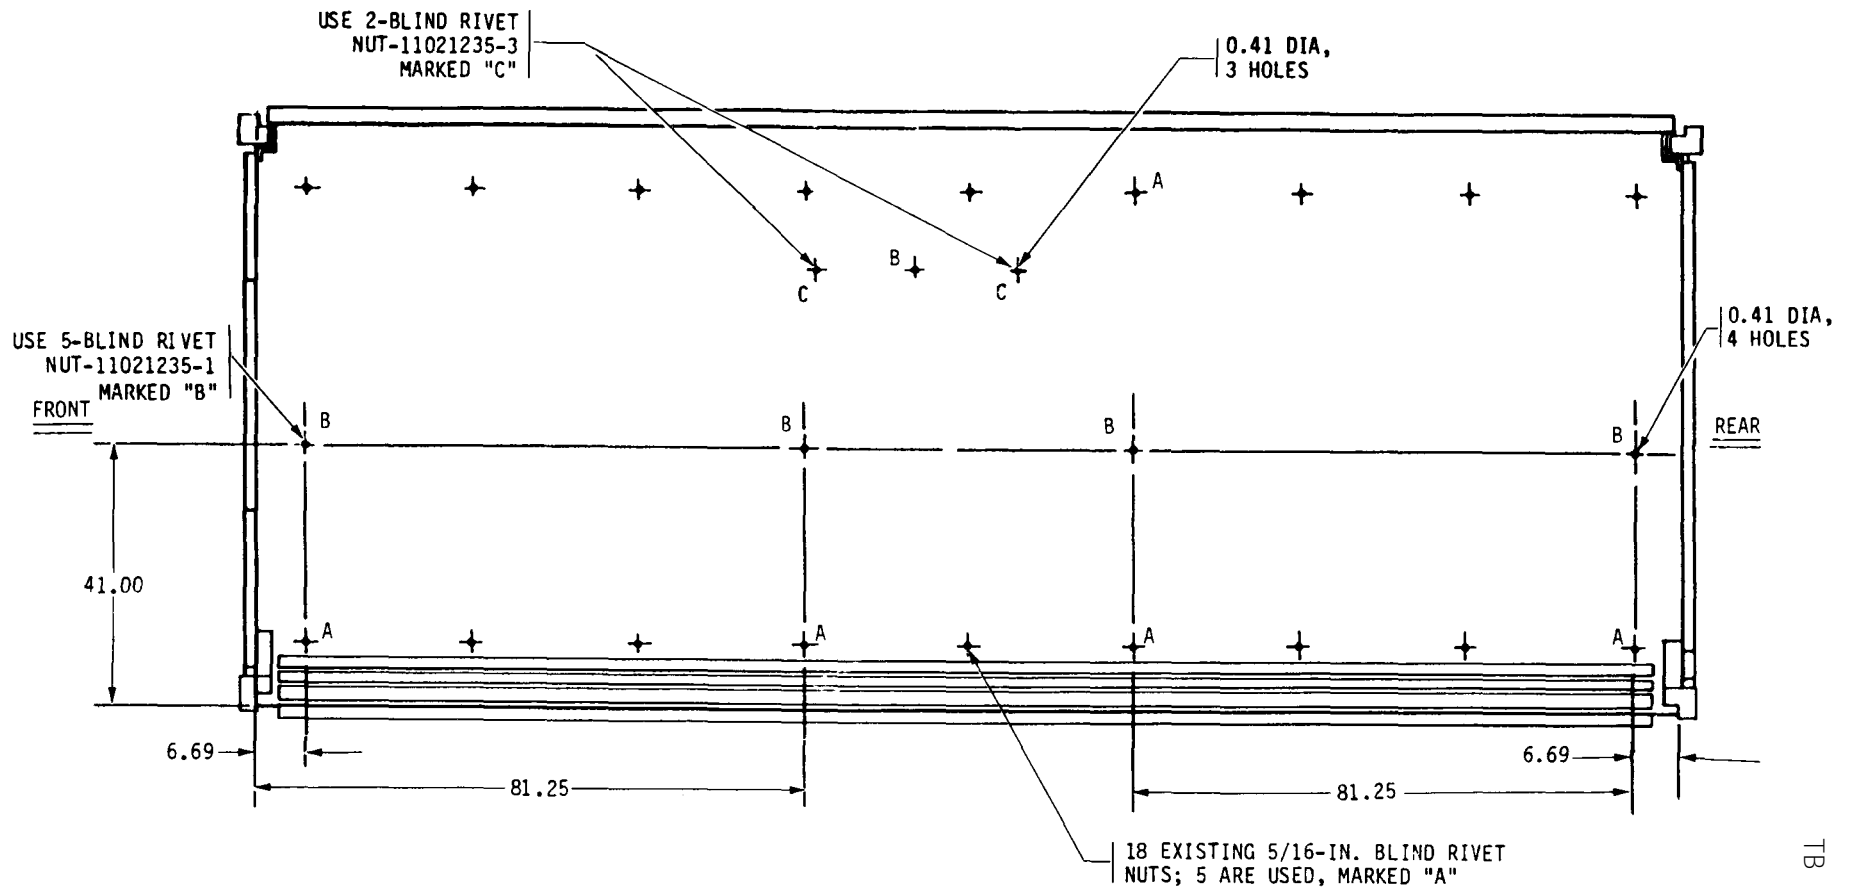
Dimensions for Blind Rivet Nuts, Floor Plan, Fixed Floor, Unit 2, ISO-2-1.
